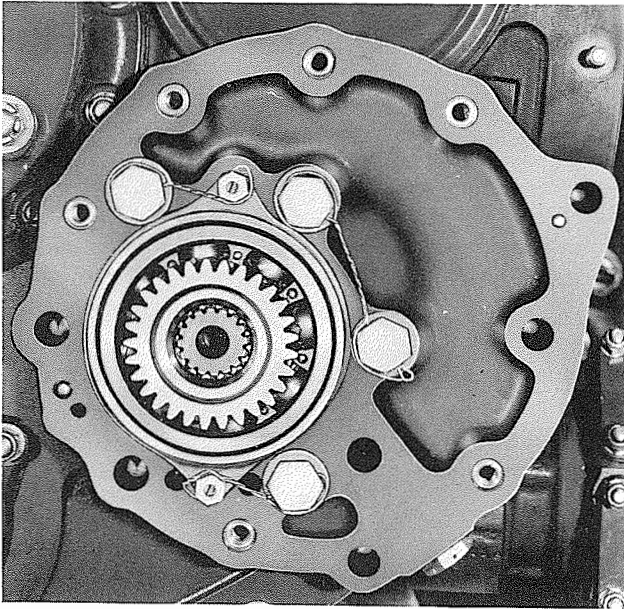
Accessory Drive Gear Box Front Housing Installed and Lockwired
